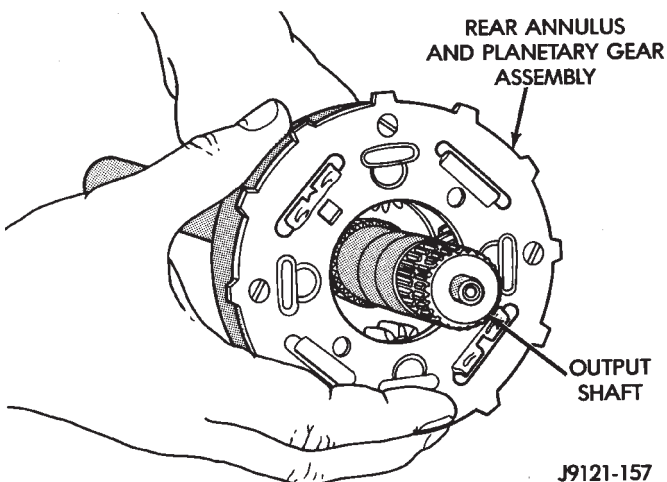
Installing Rear Annulus And Planetary On Output Shaft
